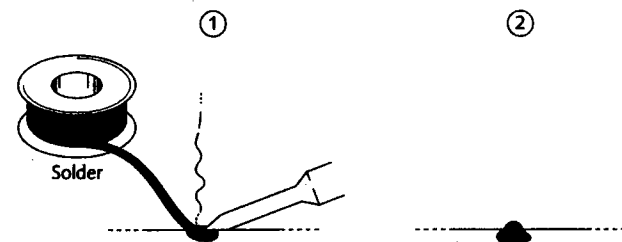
Leave a little bump of solder behind on the cleaned trace.
